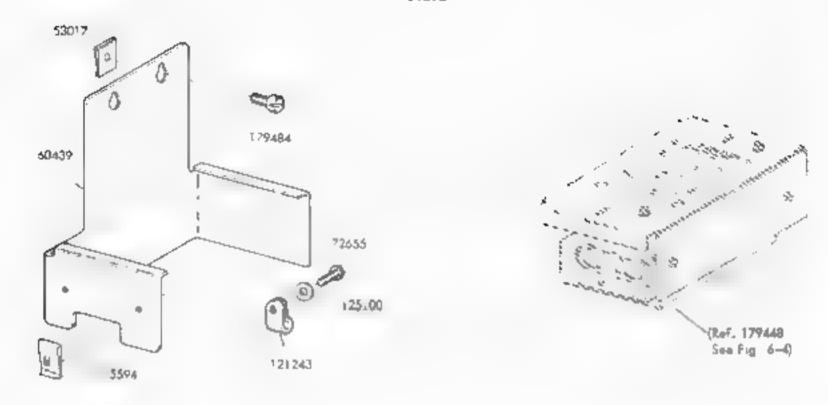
179139 AUXILIARY REPERFORATOR LINE RELAY ASSEMBLY
